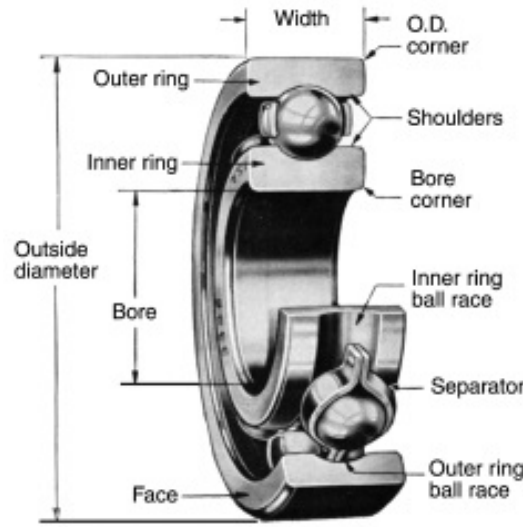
Nomenclature and design of a Ball bearing [6].
